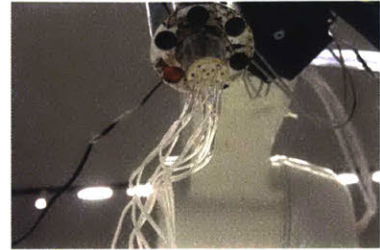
Close up view of the multi-strand extrusion nozzle while printing.
